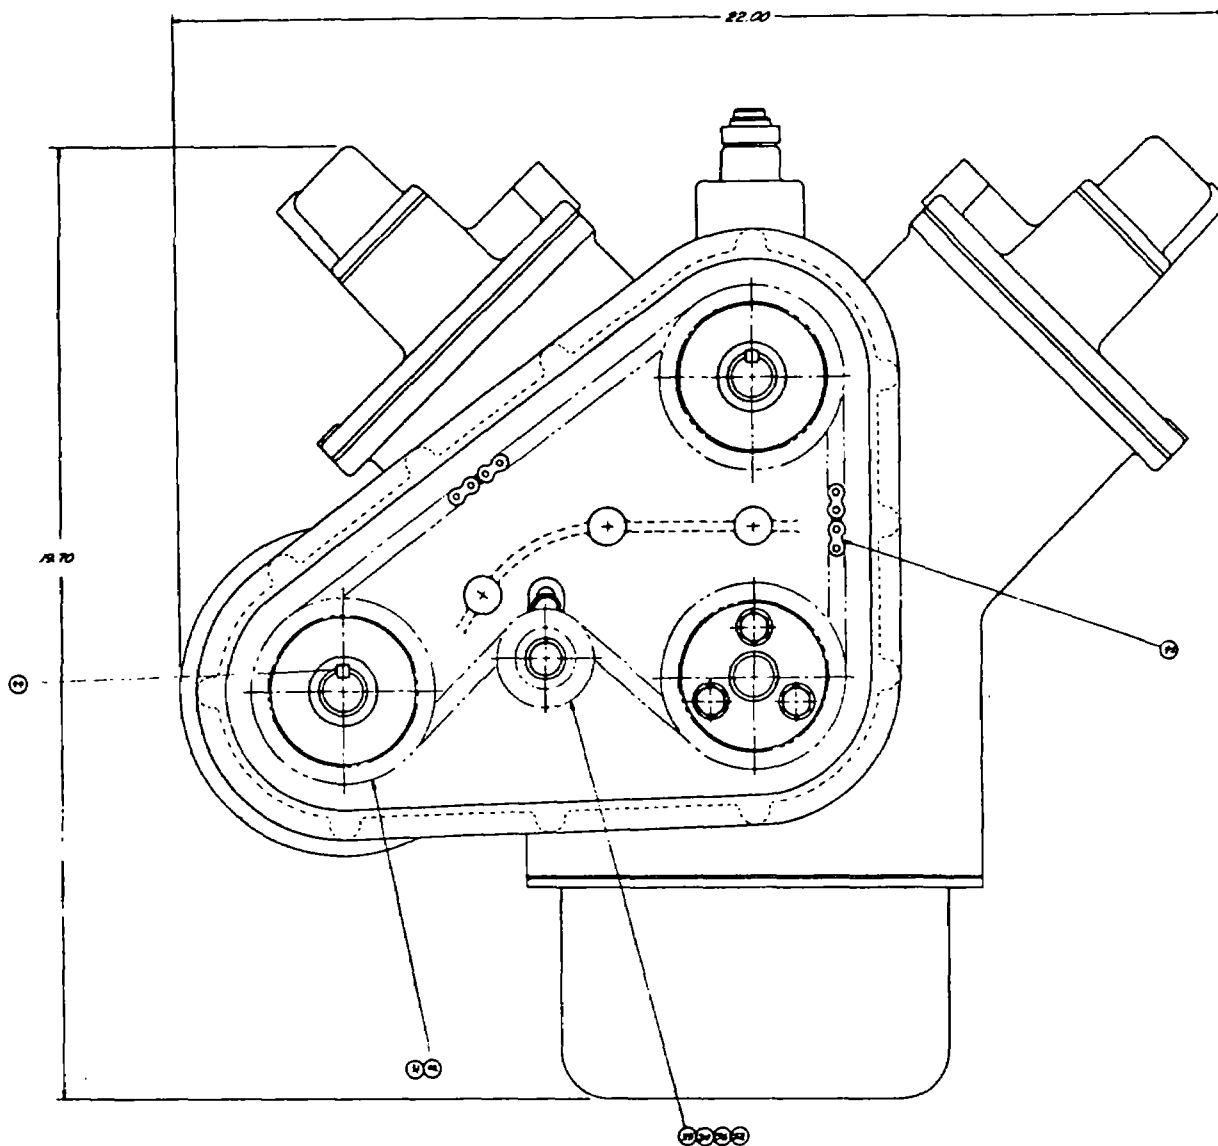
3. 14 V-4 Expander with Hydraulically Actuated Valves, Showing Feedpump and Valving Drive.
